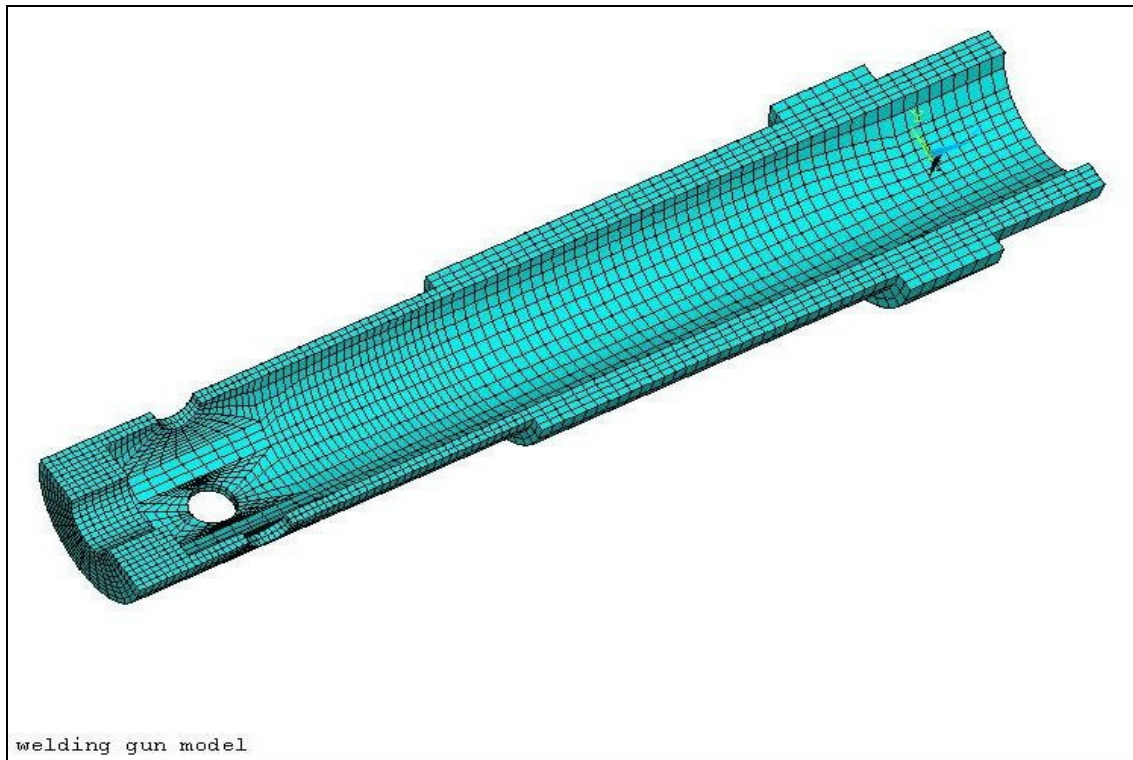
Meshing long collet body of the welding torch model in Ansys.
